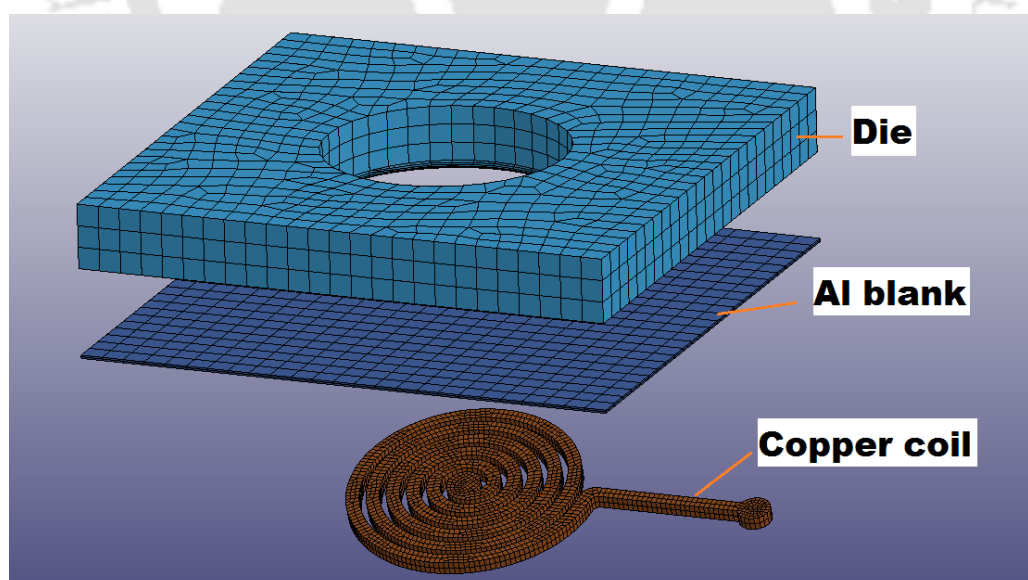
Exploded view of EM free forming assembly used for simulation.
